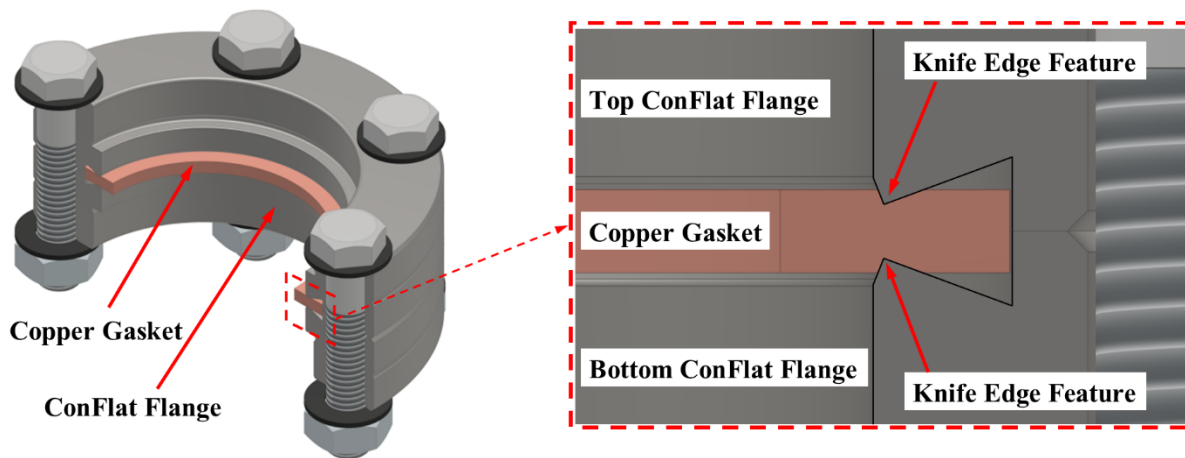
3D CAD rendering showing the Sealing mechanism for the ConFlat flange.
